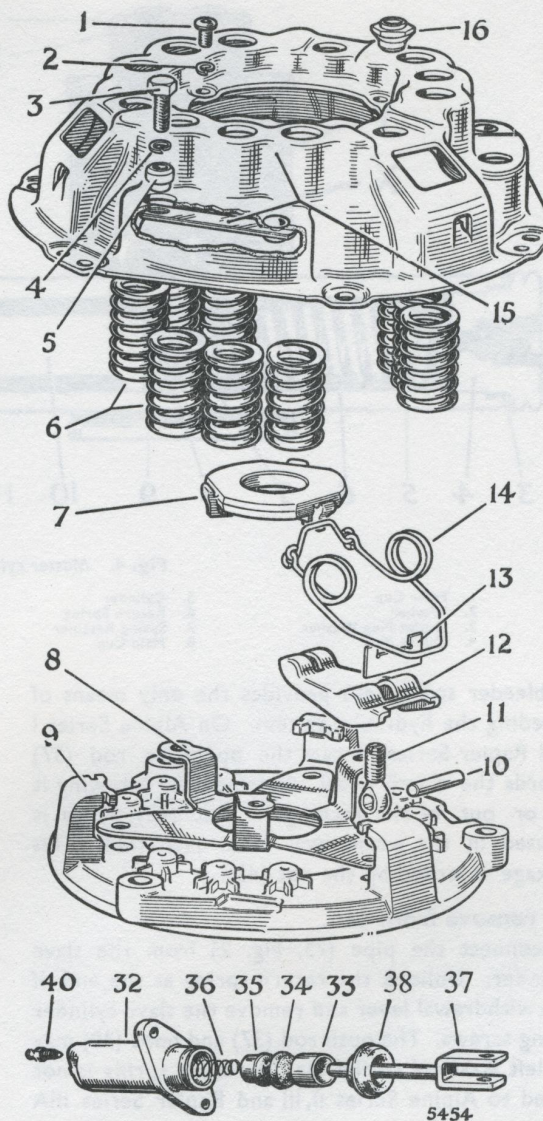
Exploded view of clutch and slave cylinder (Alpine Series II, III and Rapier Series IIIA cars).
